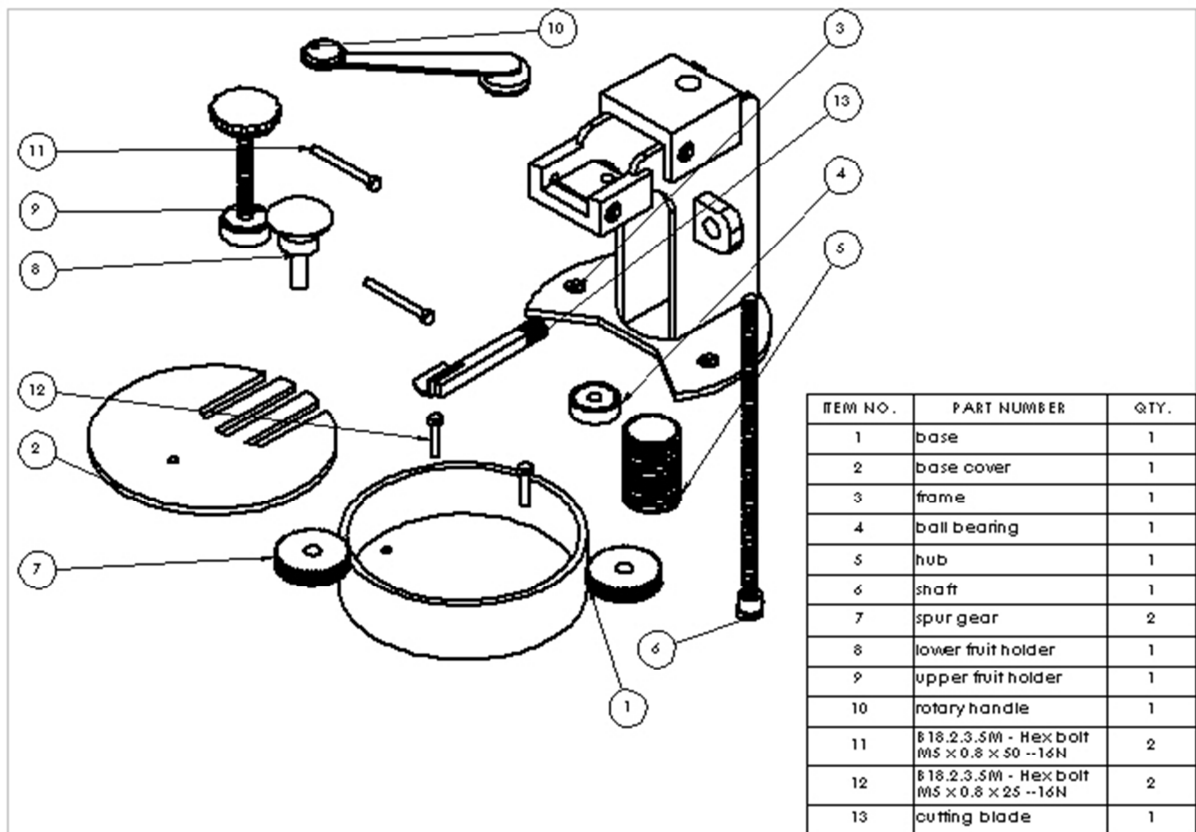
Assembly drawing of the lower section of orange peeling device showing how parts are related to one another.
